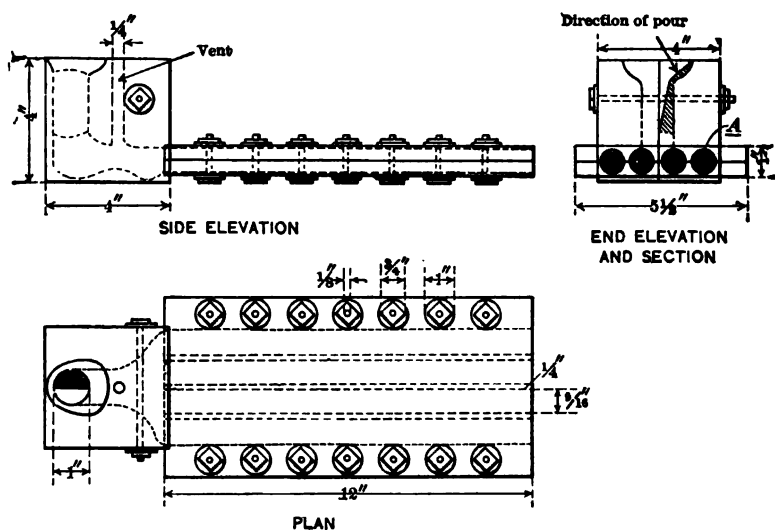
DETAIL DRAWING OF MOLD AND GATE.
